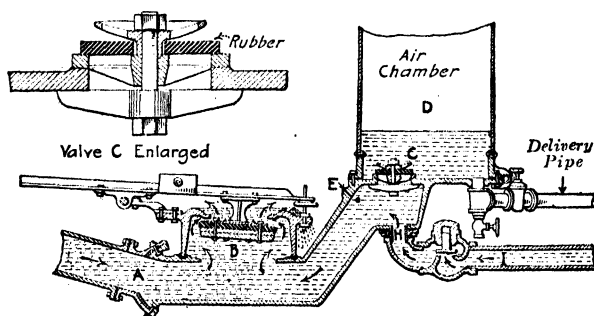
Cross-sectional elevation of hydraulic ram.³⁵
